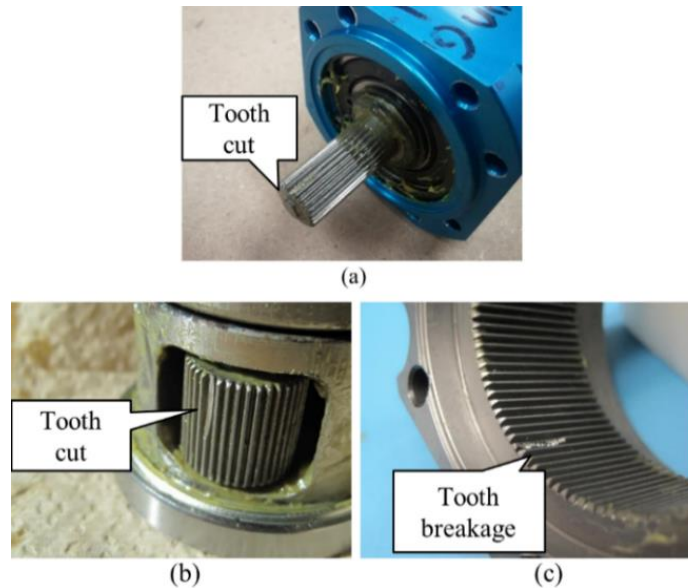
Seeded faults: (a) sun gear fault, (b) planet gear fault, (c) ring gear fault.
